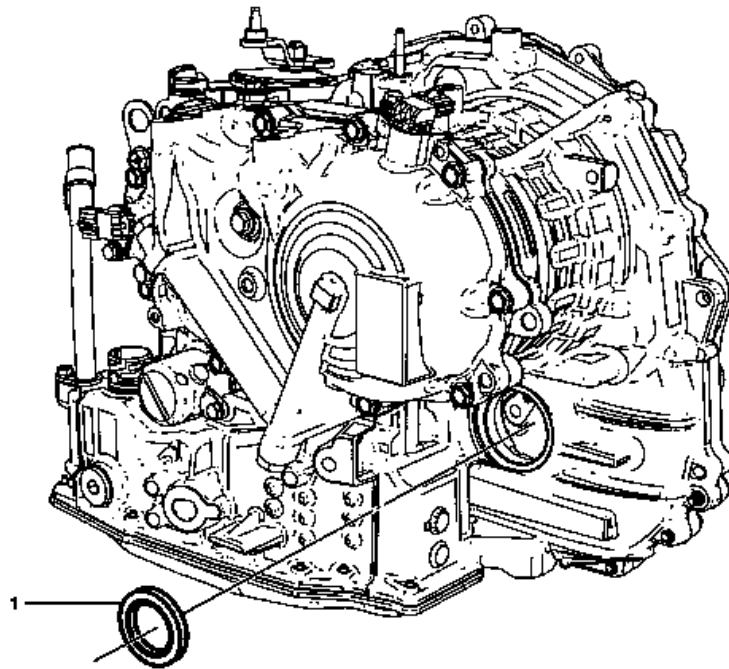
Front Wheel Drive Shaft Seal - Left Side
